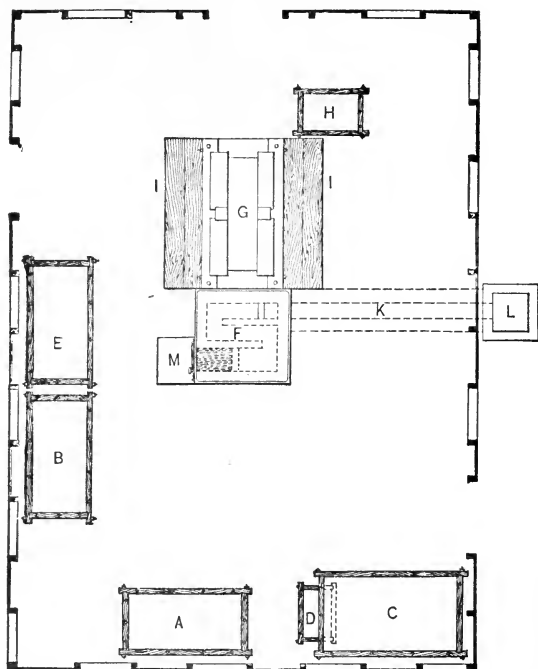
FLOOR PLAN OF GALVANIZING ROOM WITH UNDERGROUND FLUE
